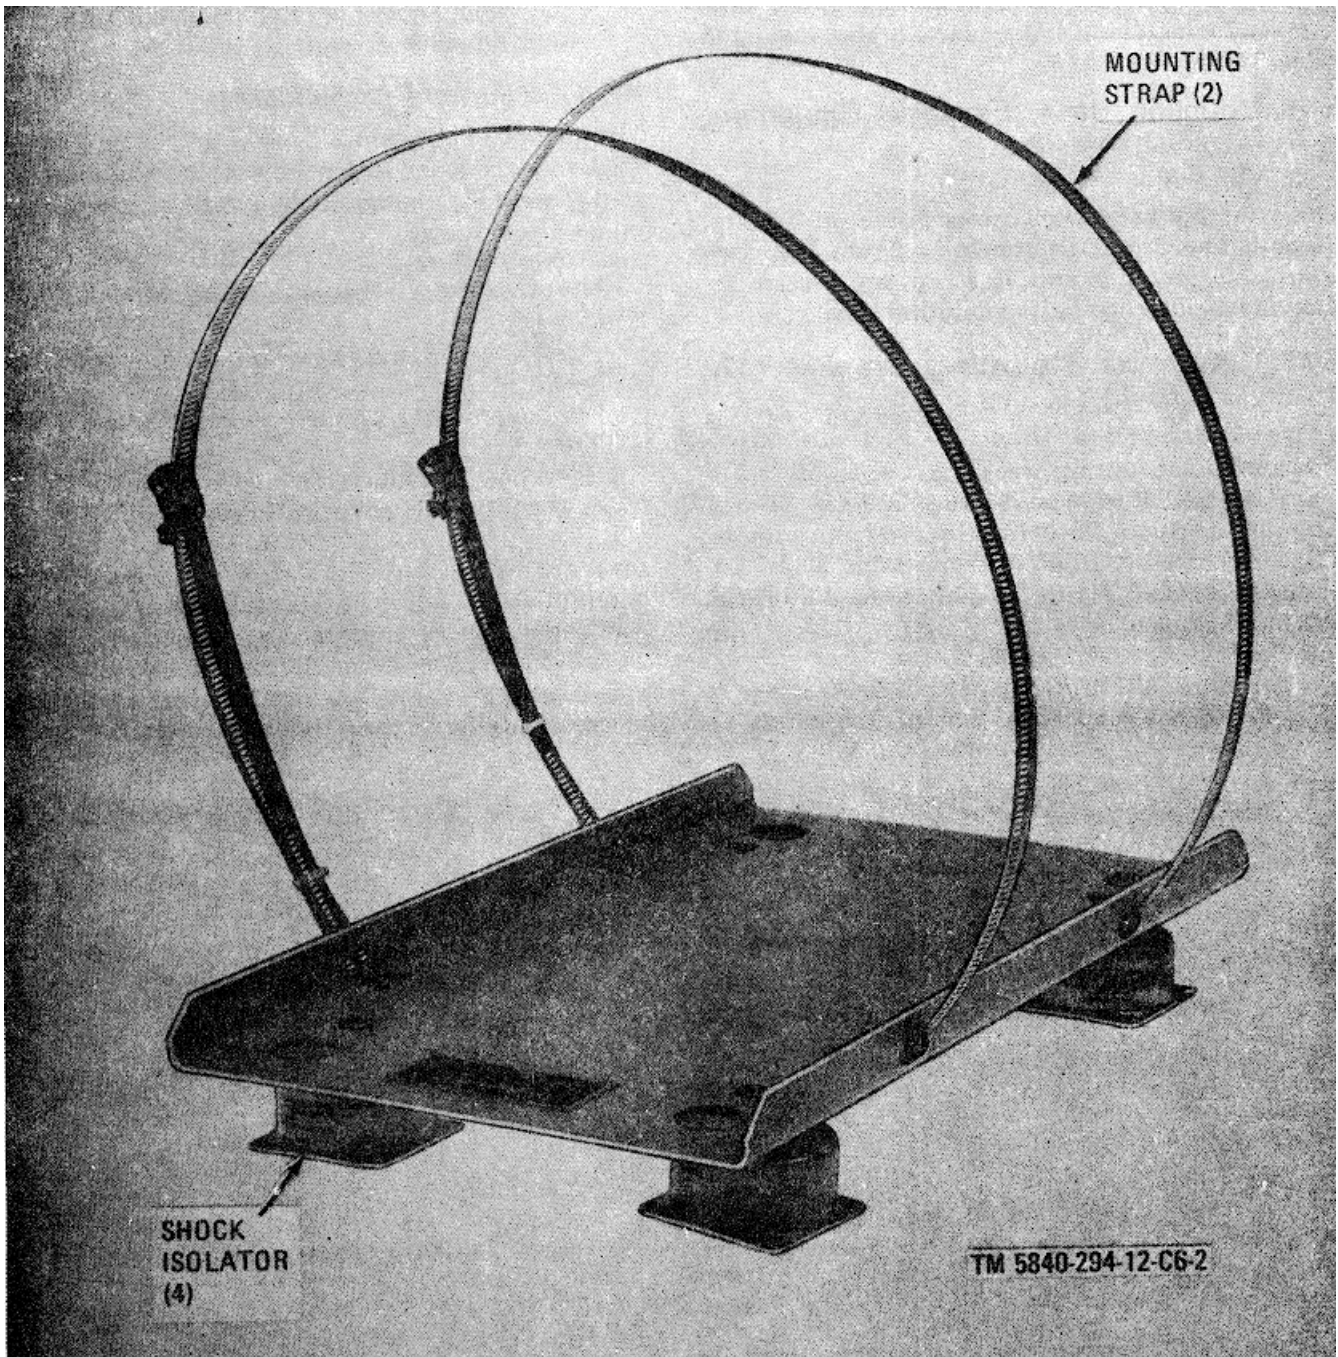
Mounting Base, Electrical Equipment MT-4803/TKQ-2A
